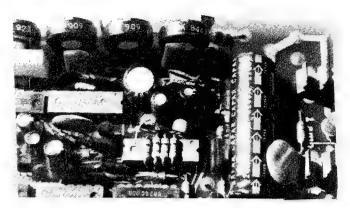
Transistor package on uncoated board eroded after DS-2 exposure for one week.
